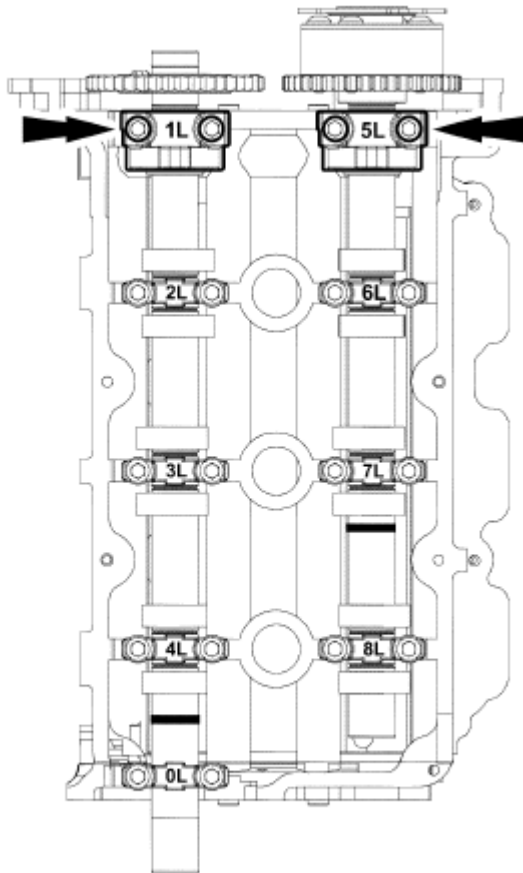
Identifying LH Camshaft Bearing Caps & Bolts
